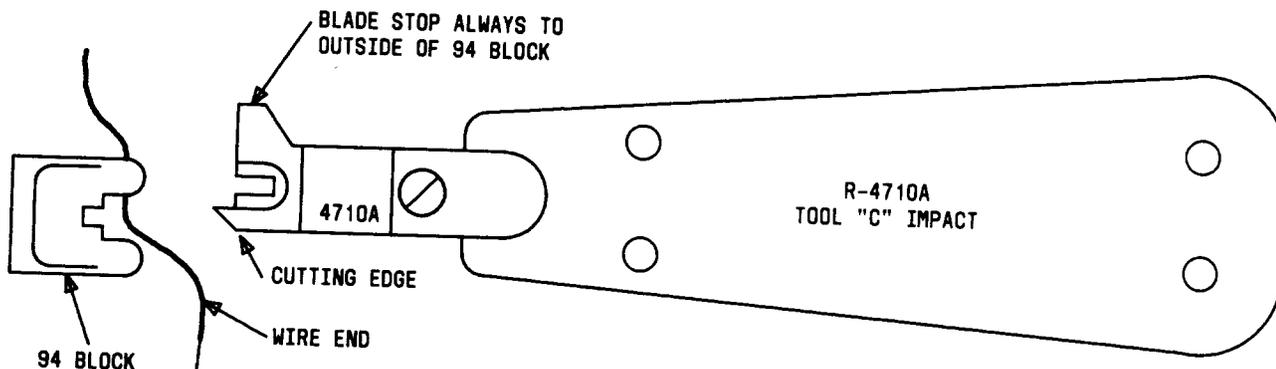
R-4710A "C" Impact Tool and 94-Type Connecting Block
